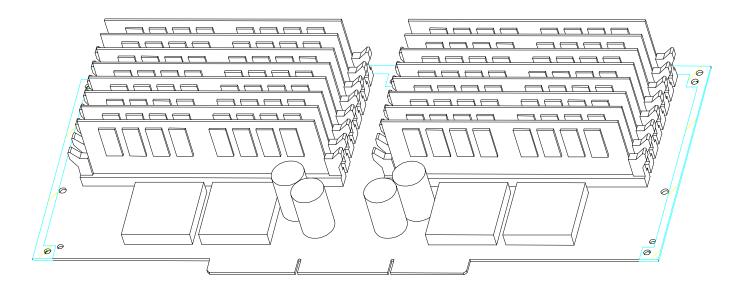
SKA4 Memory Module Mechanical Drawing
